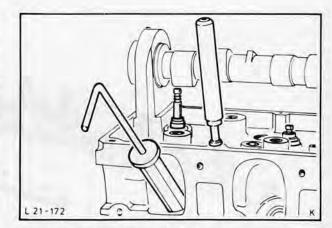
Fit valve stem seal, using Special Tool 21-007
